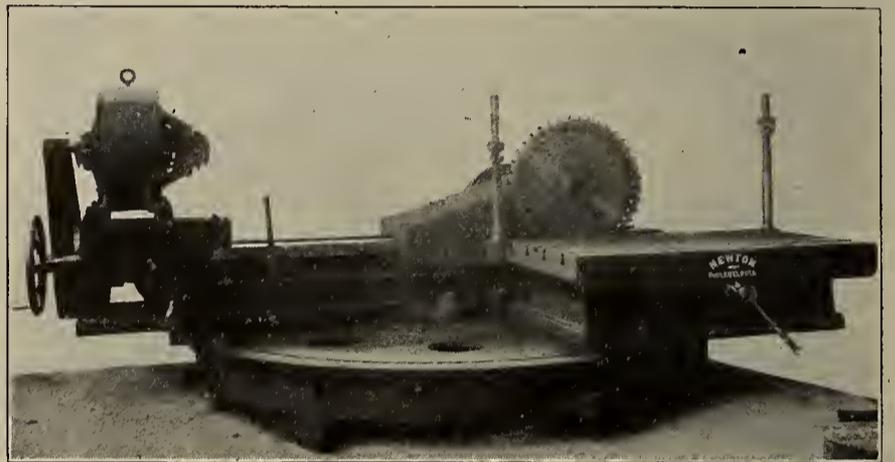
COMBINED PLANING AND SAWING MACHINE.
